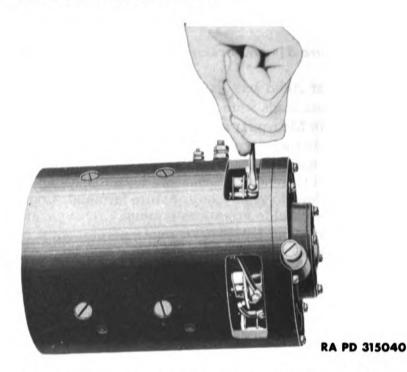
Disconnecting Brush Lead from Holder on GBG-type Generators
